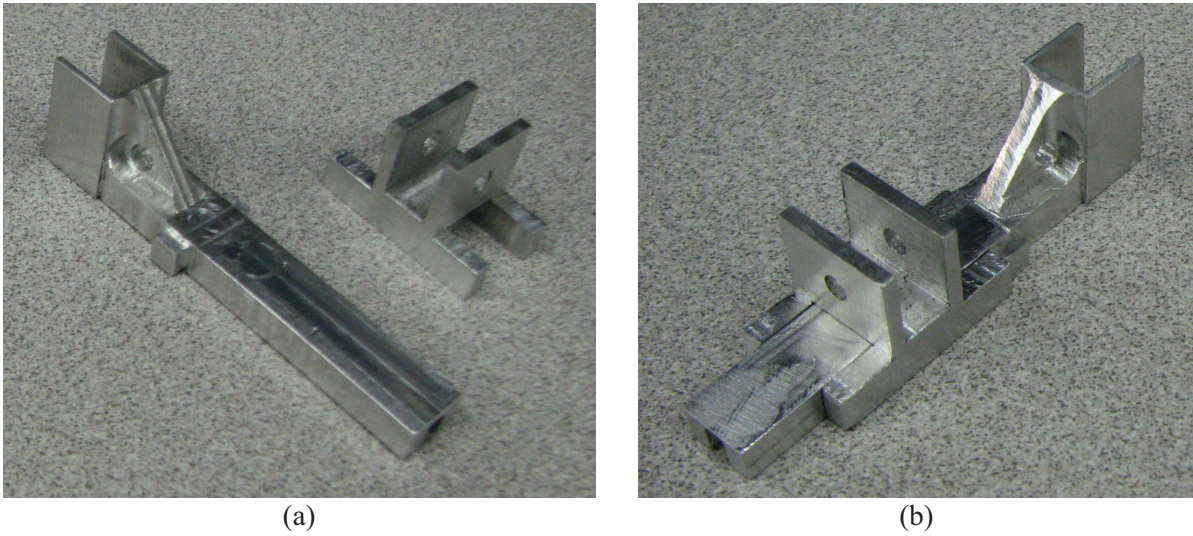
Prototype details: (a) last sliding guide parts and (b) how they are supposed to be assembled.
